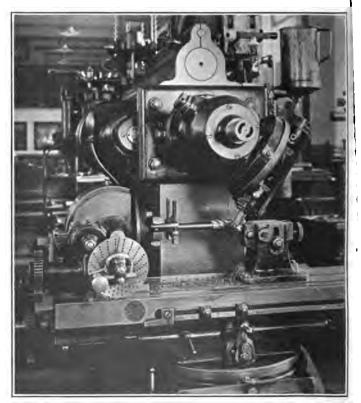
Milling a steep spiral. (Dickinson High School.)
